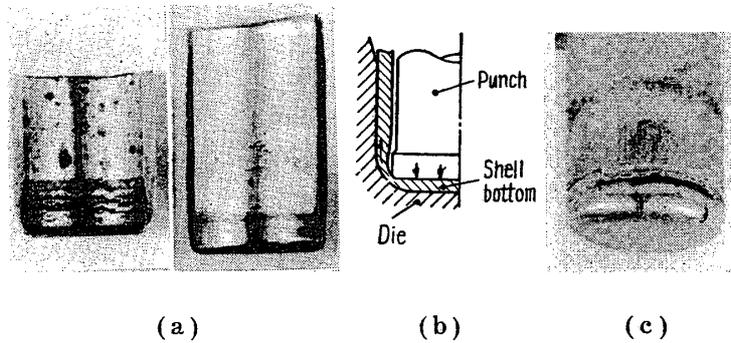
Thinning at Lower Portion of Extruded Side-Wall Accompanied by Circumferential Cracking of Wall or Radial Cracking at Bottom Edge.
